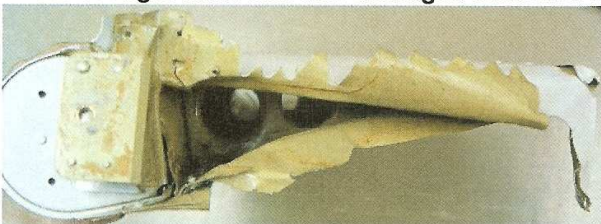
Left hand elevator fracture surfaces (digital)
